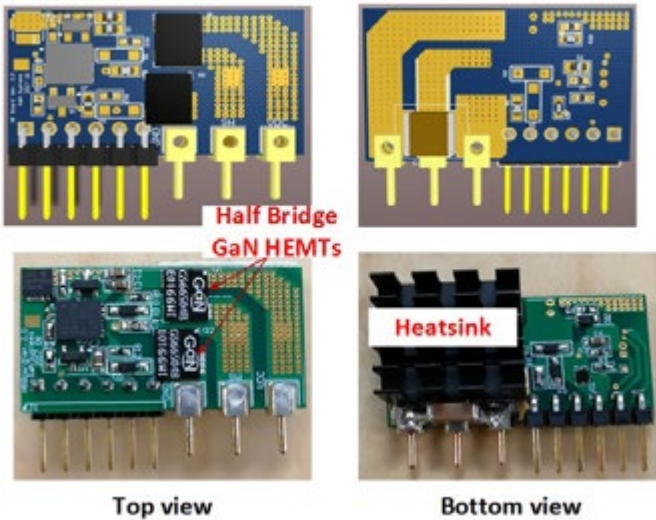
Primary side half bridge daughter card PCB layout (top) and pictures (bottom)
